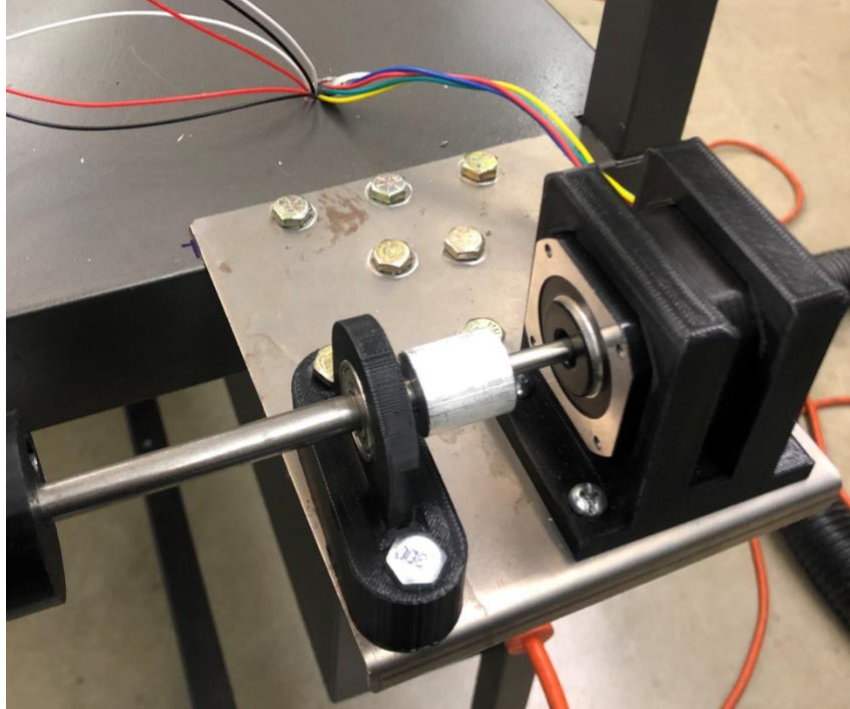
Spooling Motor and Bearing Mounted to the Sheet Metal Extension
